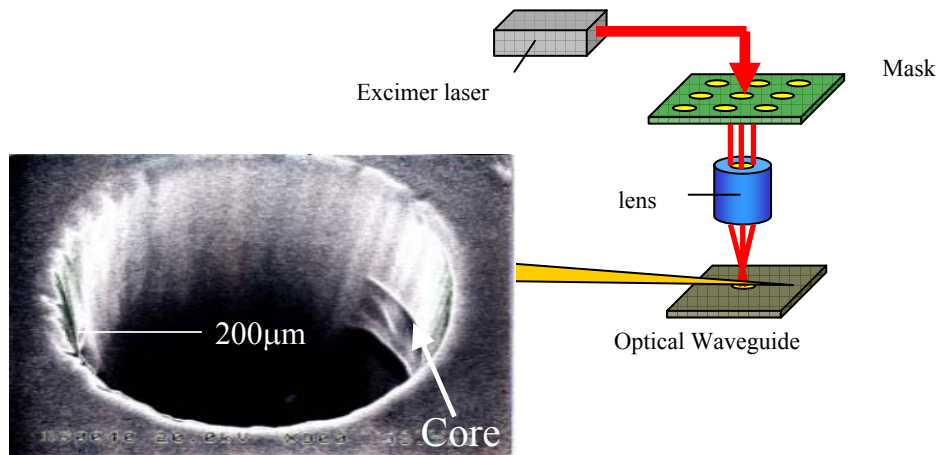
Fabrication of through-hole for Optical Pin using Excimer laser ablation
